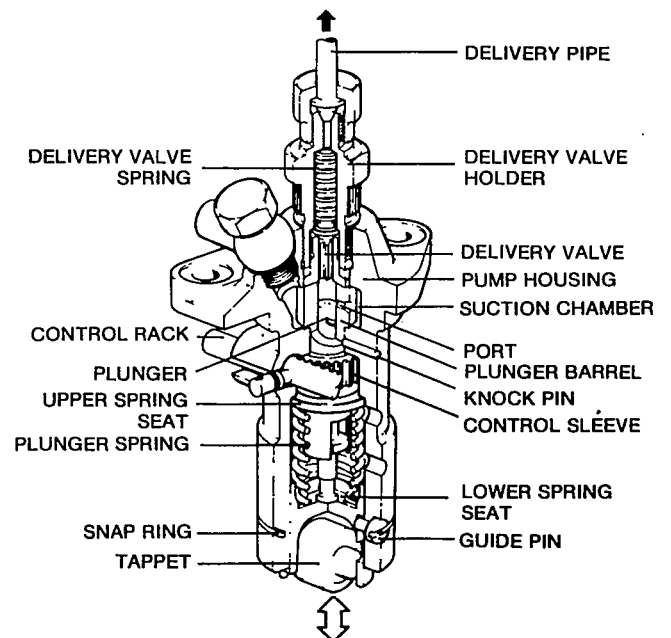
SINGLE INJECTION PUMP ASSEMBLY
